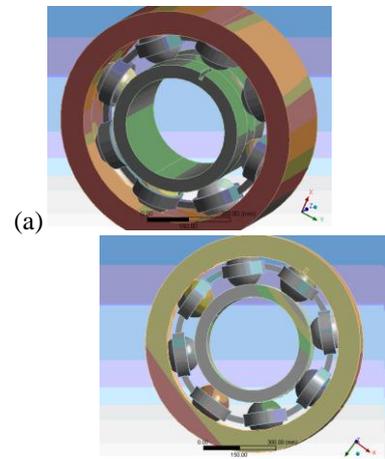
Bearing model with inner (a) & outer (b) race defects.
